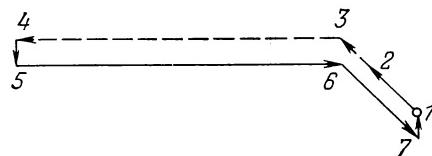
Working cycle of tool motions for the front (longitudinal) carriage of a multiple-tool lathe:
